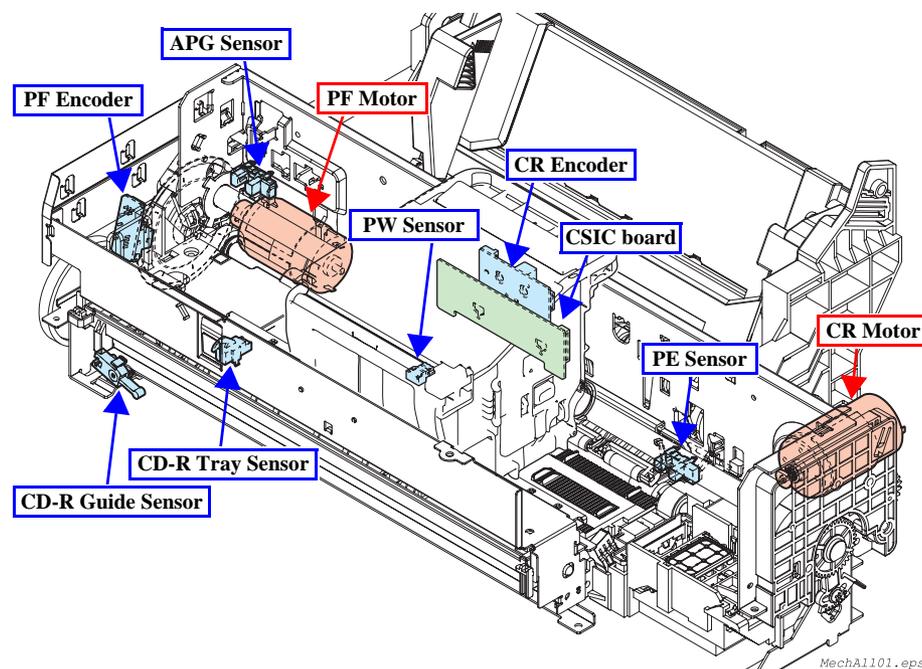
Motors and Sensors (Front Side of Mechanism)
